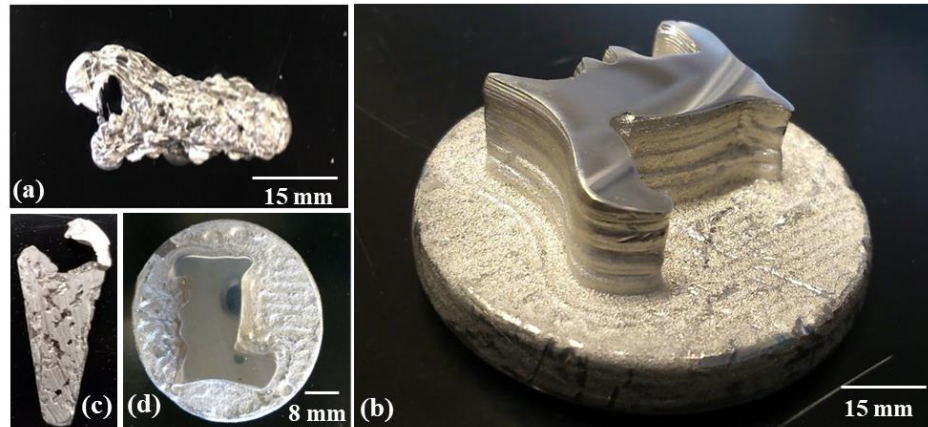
Metal prototypes fabricated using an FFF 3D printer. (a), (c) Mechanical wrench fabricated using FFF 3D printing methodology (b), (d) Customized UofL (University of Louisville) souvenir logo fabricated using FFF 3D casting methodology
